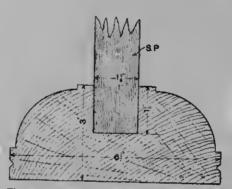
Section of Bottom Stand and Sidepiece of Portable Desk.
